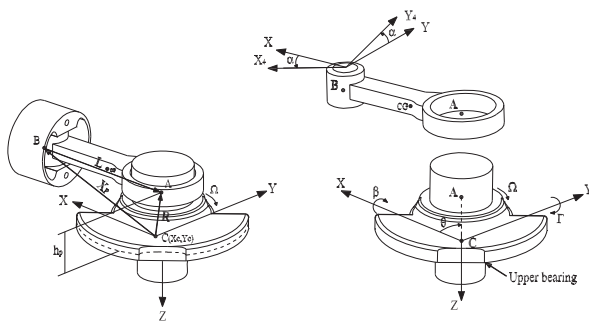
Piston – connecting rod – crank system. Geometry and reference frames
